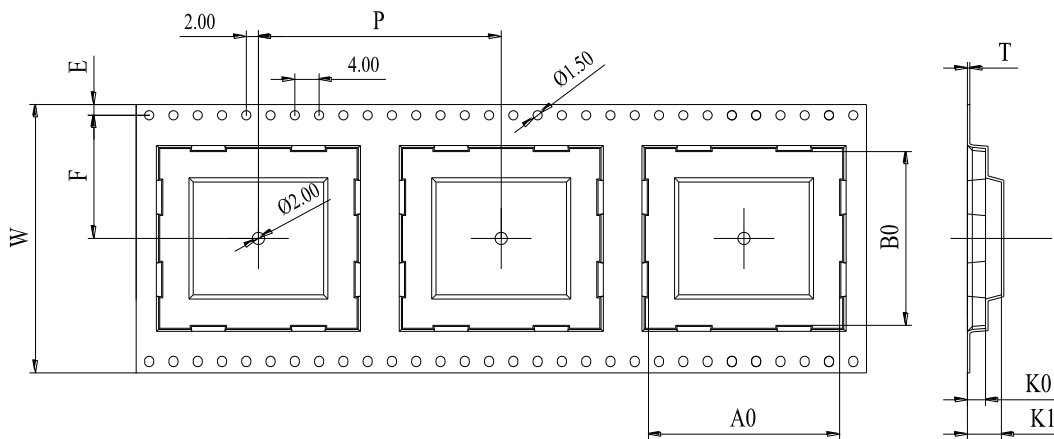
Carrier Tape Dimension Drawing (Unit: mm)
